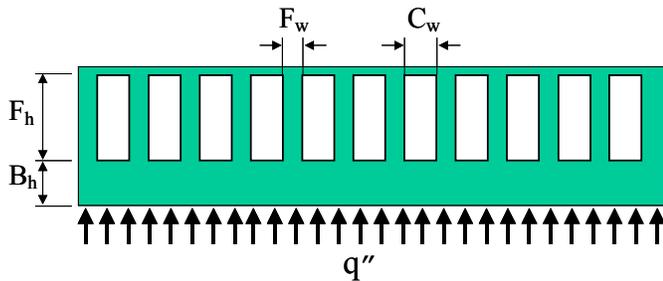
Dimensions of the microchannel heat sink (The drawing is not to scale)
